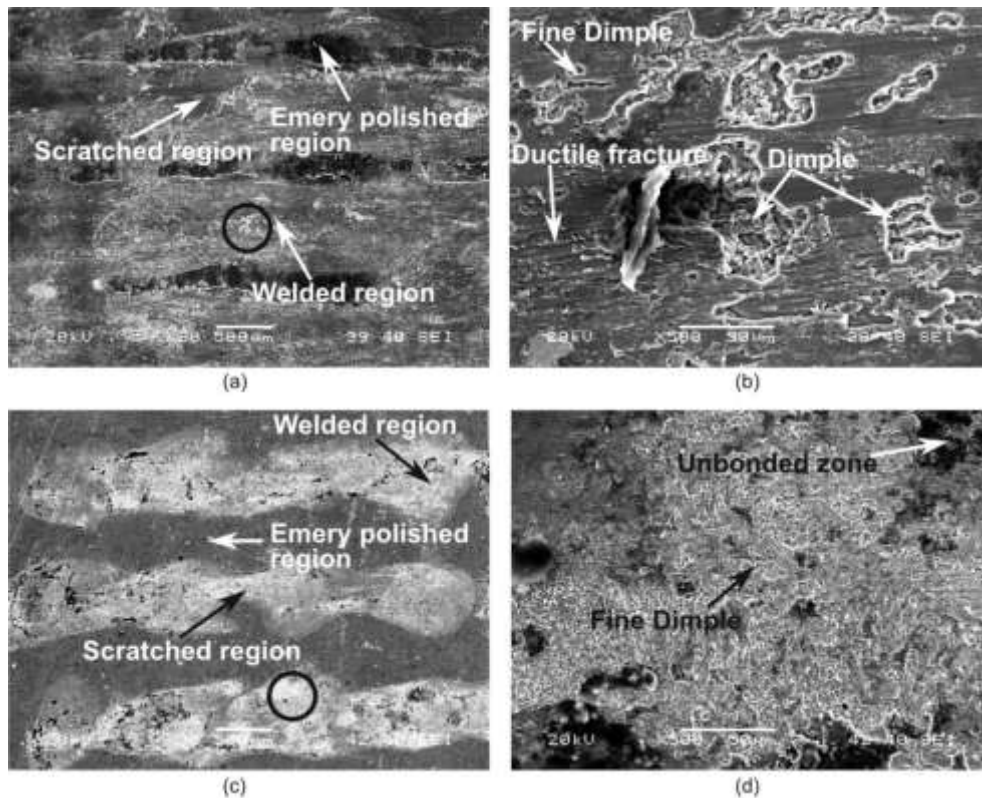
Fractured surfaces of ultrasonically welded specimens in emery surface condition (a) Al side surface with 30X zoom; (b) Magnified image of a; (c) Cu side surface with 30X zoom; (d) Magnified image of c
